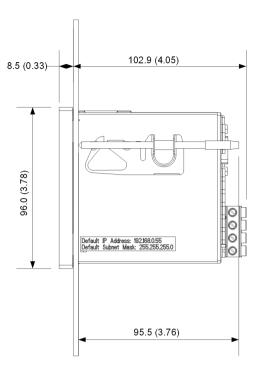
Dimensional Drawing of SICAM P850/P855, DIN Rail Device
